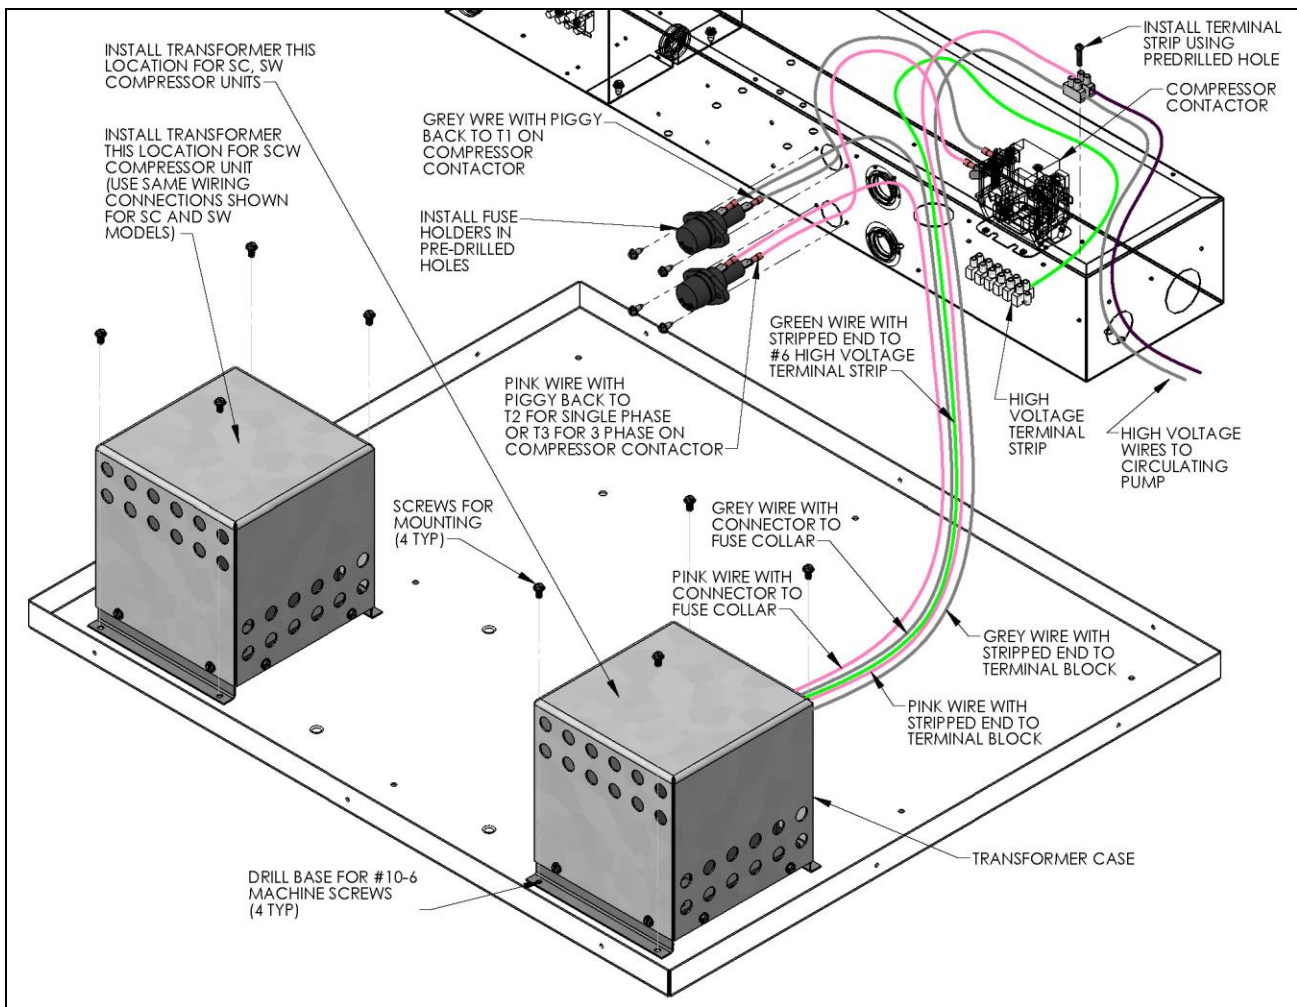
PW2 Assembly to Electrical Box and Base Pan
